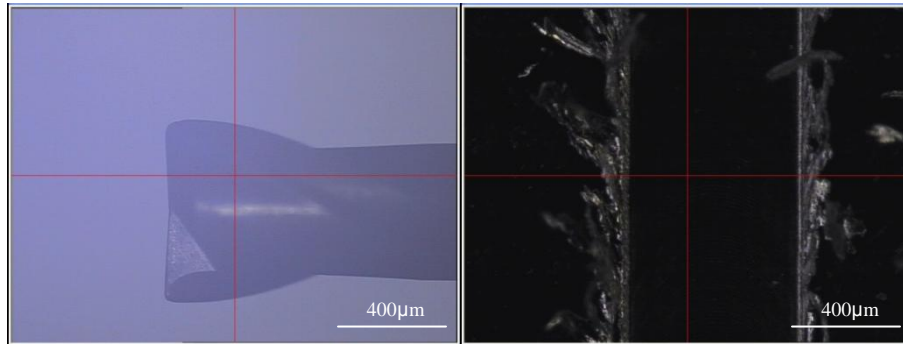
Micro-milling tool and burrs formed in slot milling
